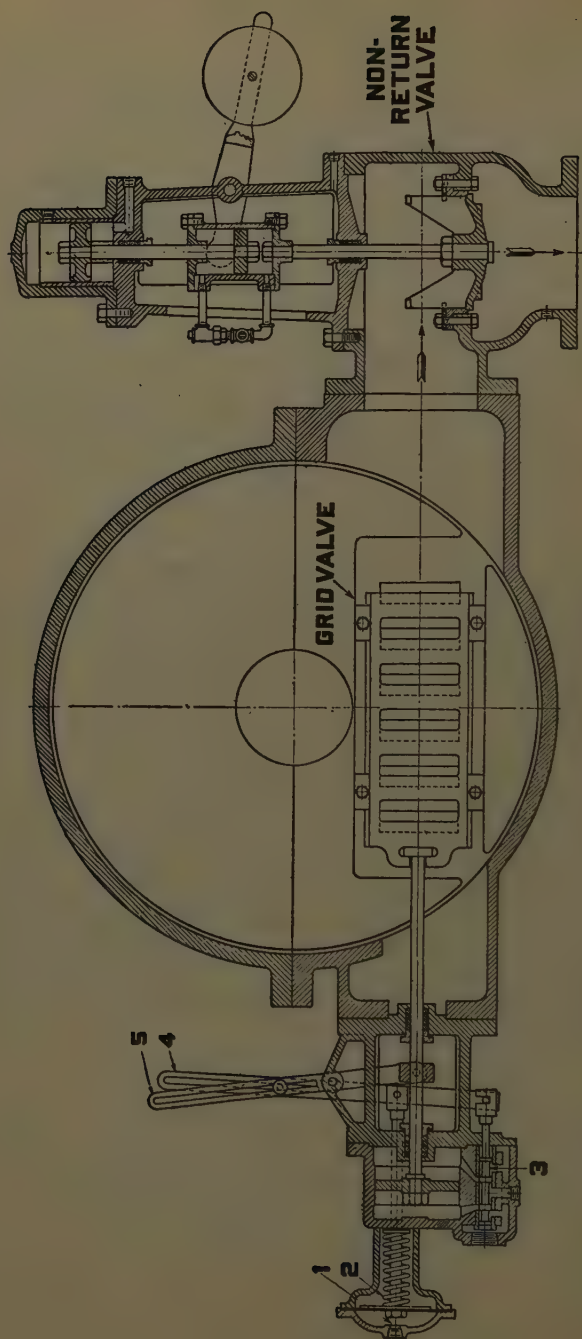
BLEEDER-TURBINE VALVE GEAR
